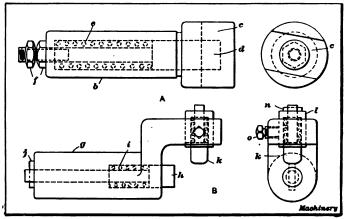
Standard Chuck-closer, and Device for Locating Work on the Holder shown in Fig. 27
